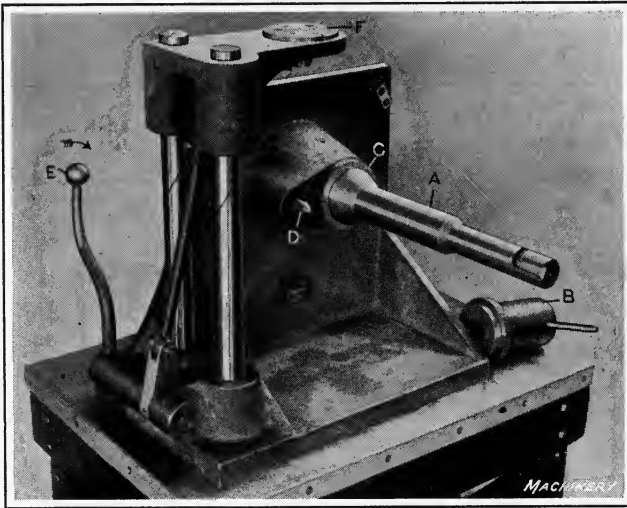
Drill Jig provided for drilling Three Small Holes in Pedal Support Boss
